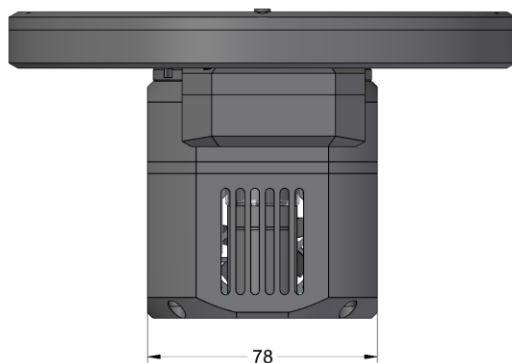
C1+ camera head with External filter wheel bottom view dimensions
